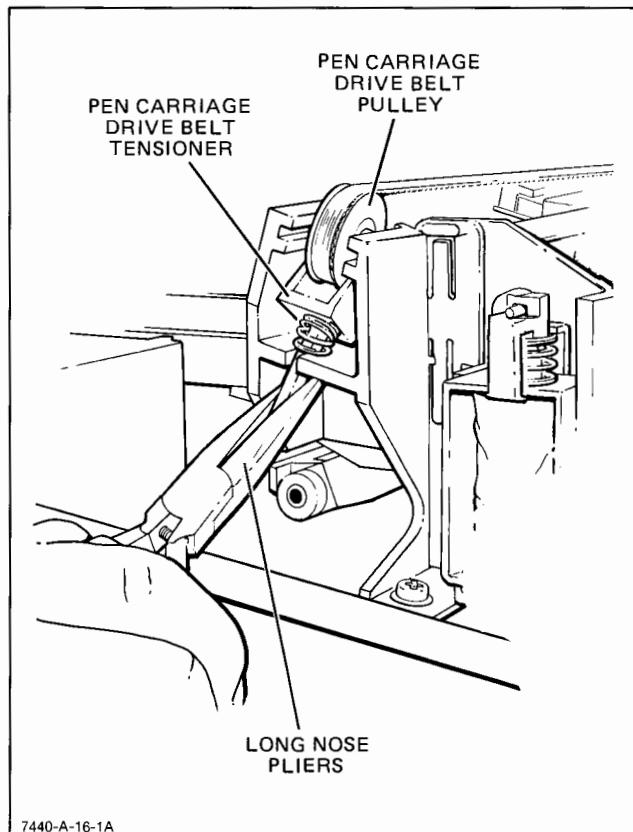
Pen Carriage Drive Motor/Encoder Assembly Removal, Detail A
